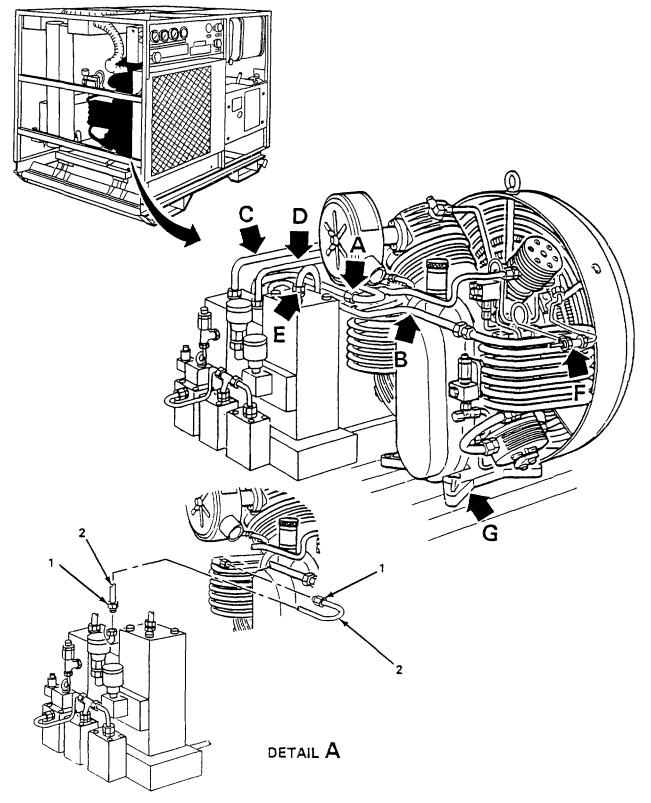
Compressor Assembly, Replace (Sheet 1 of 3).
